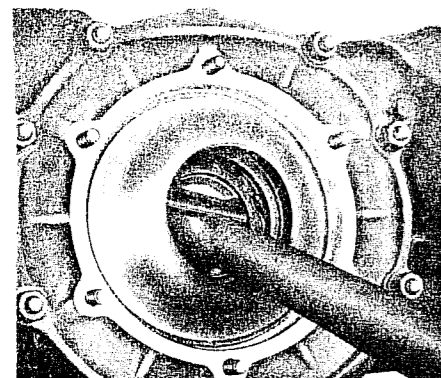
Location of the axle shaft circlip. - Swing axle.
